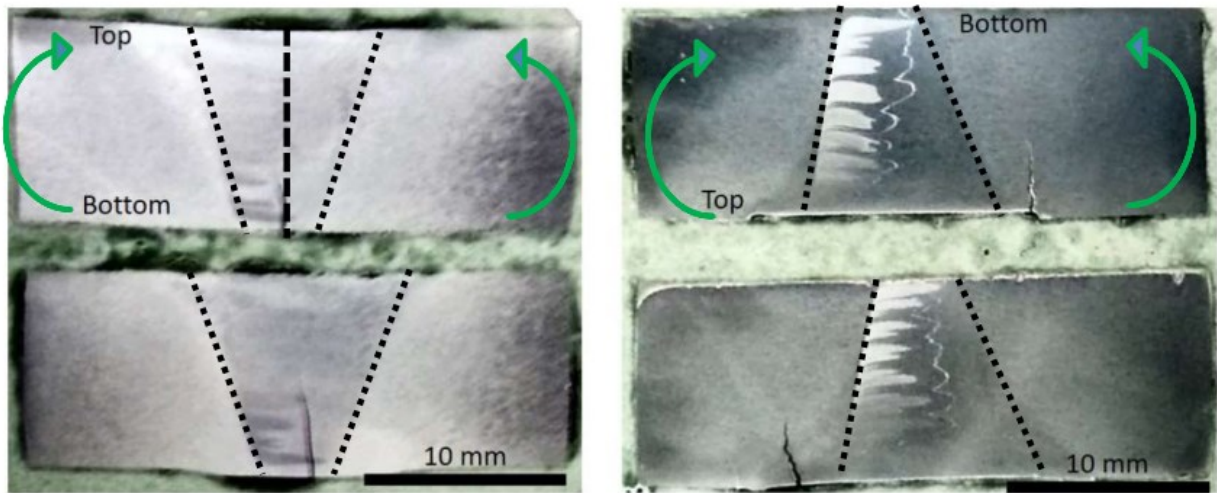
Cross-section of welds after bending tests for specimens tested in “Bending Bottom” test configuration (left) and in “Bending Top” test configuration (right)
